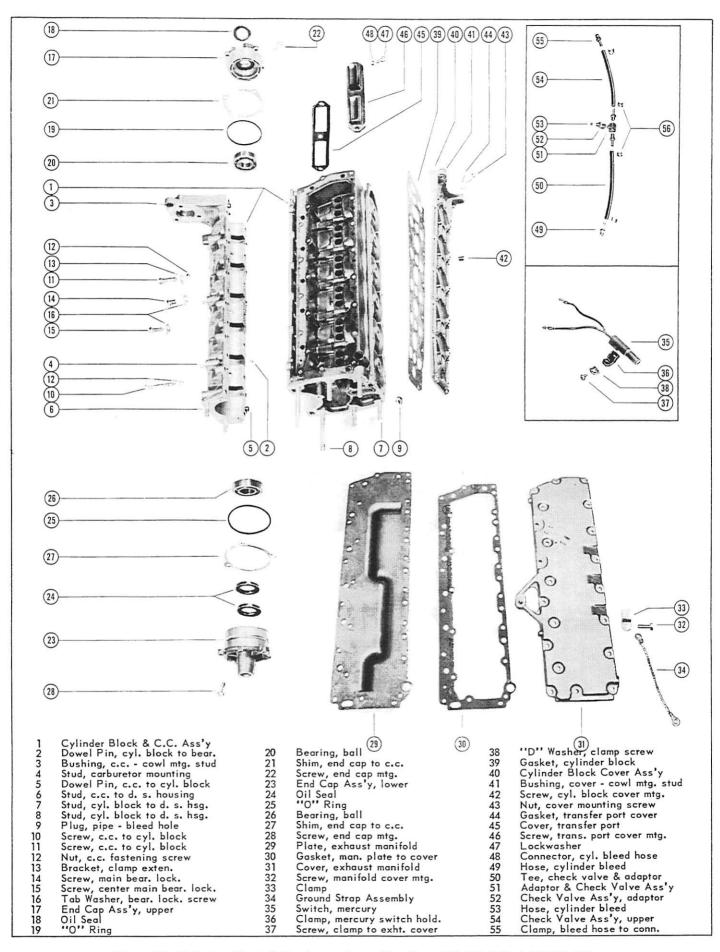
Cylinder Block & Crankcase Assembly, Merc 700-600 & Mark 78-78A-75A
